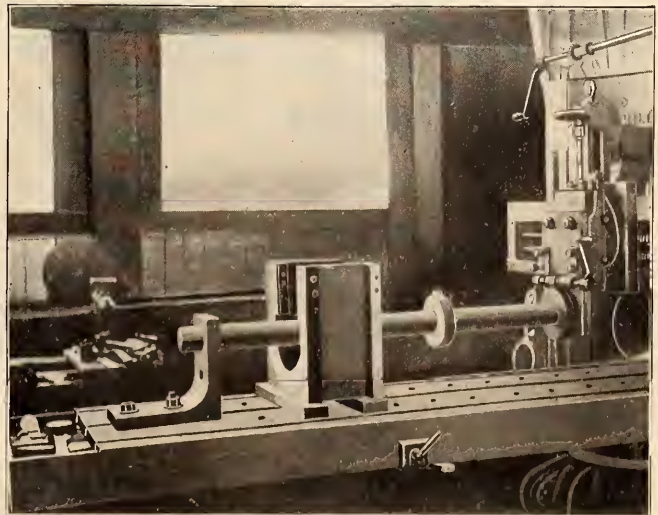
METHOD OF BUSHING MAIN VALVE BUSH OF 9 1/2-IN. AIR PUMP.
